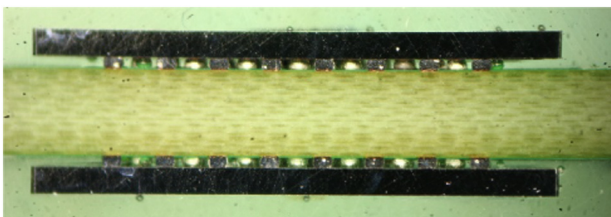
Cross-section (over the diagonal) of the CSP's soldered at both sides of the 2.4 mm thick PCB.
